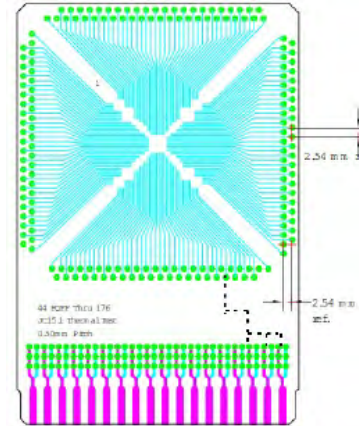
Nested PCB design (44-176PQFP) (dotted line shows possible routing)
